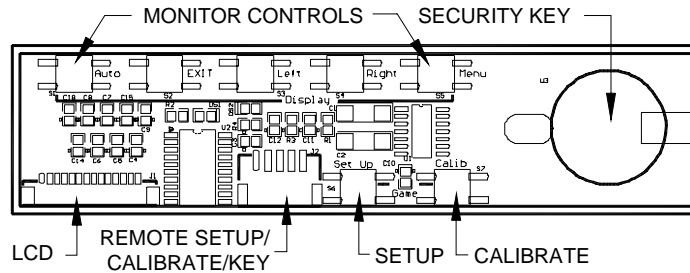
ON-SCREEN DISPLAY BOARD DRAWING
